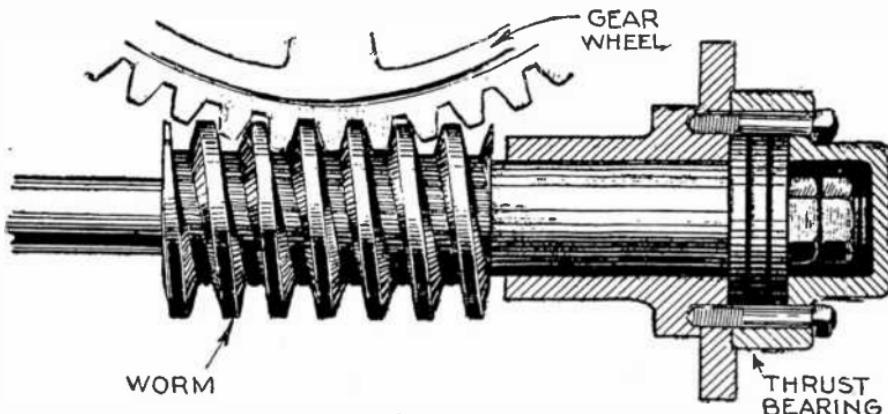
,771.—Single worm drive with ball bearing end thrust. The shaft on which the worm is cut is direct connected to the motor through a coupling with pulley shaped flange which is used as a braking surface. The single worm drive is suitable for relatively slow car speed and light loads. *In construction* worm drives are arranged to run in oil, accordingly the worm is placed below the gear wheel.
